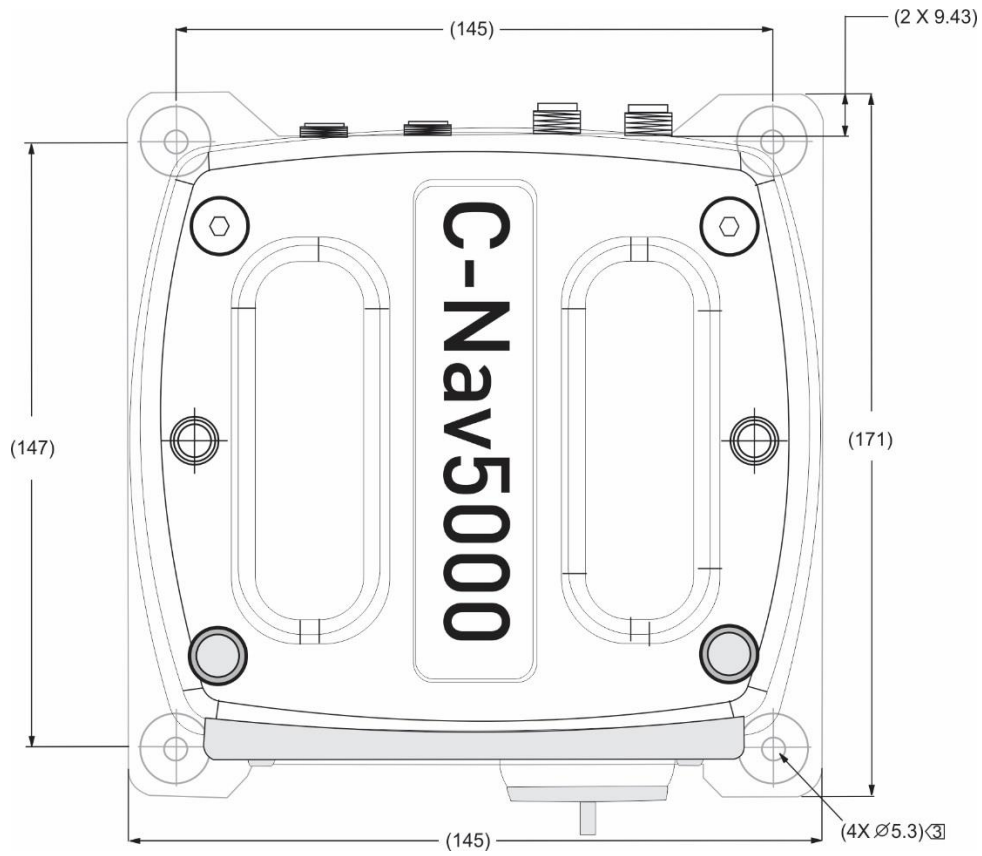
C-Nav5000 Base Plate Dimensions with Mounting Brackets
